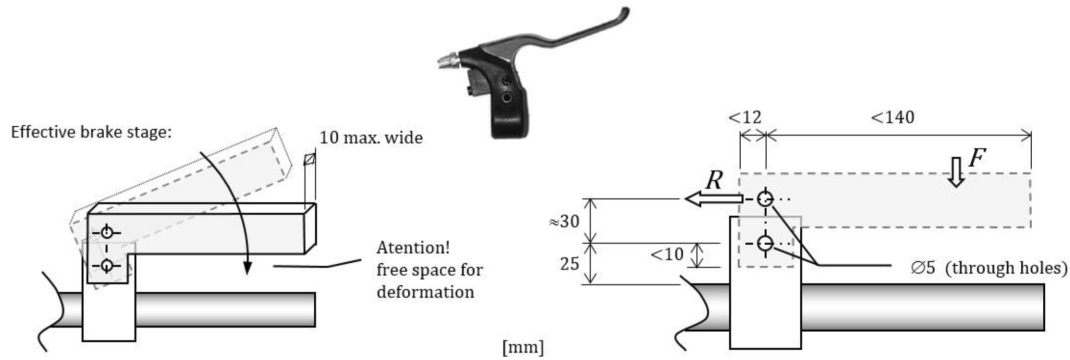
Scheme of one of the tools to be designed: brake handle (dimensions in mm).
